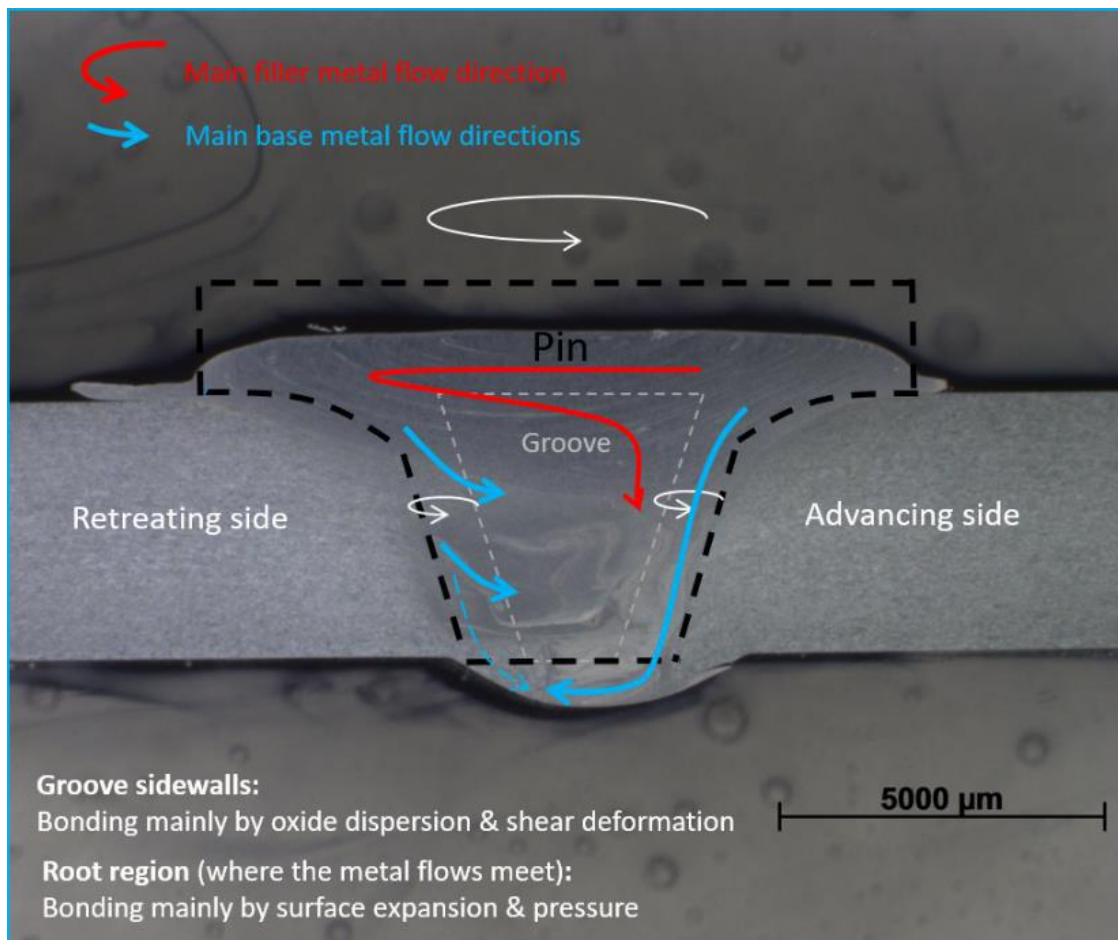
Illustration of material flow pattern during HYB butt welding of plates (Ø. Grong 2017)
